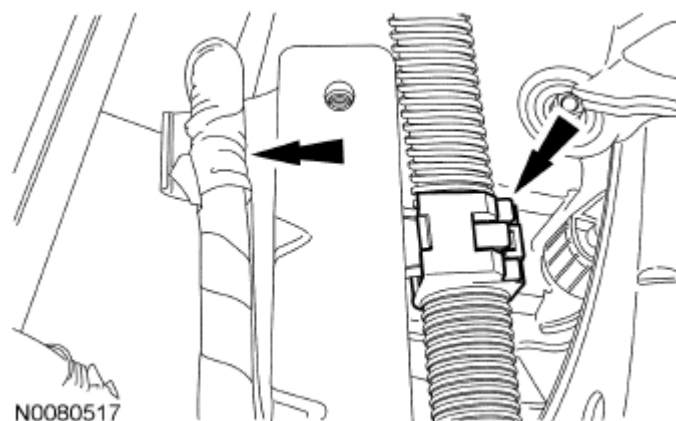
Locating Wiring Harness Retainers On Battery Tray Bracket
